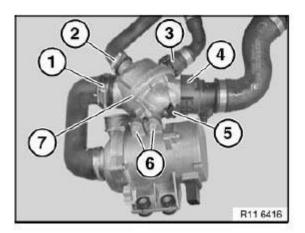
Identifying Hose Clamp, Coolant Hose & Coolant Thermostat Courtesy of BMW OF NORTH AMERICA, INC.
